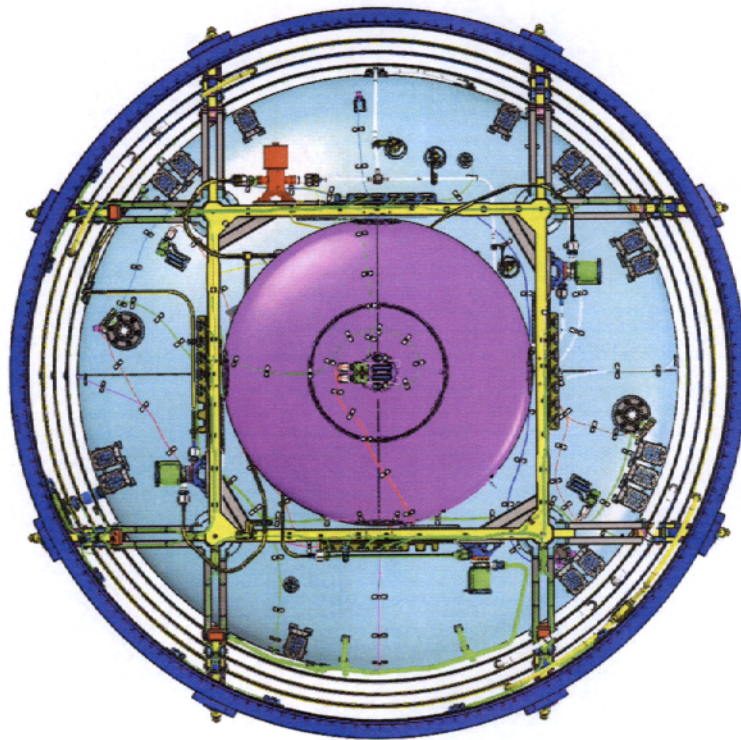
PFM Bottom-View on HTT & HOT CCH Routing & Attachments
